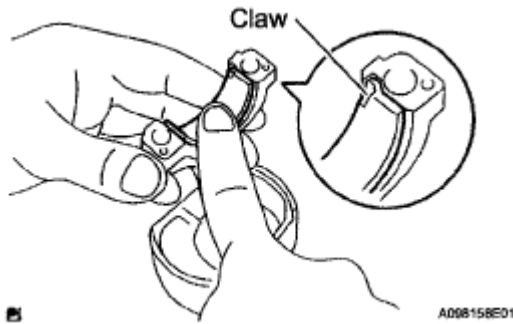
Aligning Bearing Claw With Oil Groove Of Connecting Rod Or Connecting Rod Cap
